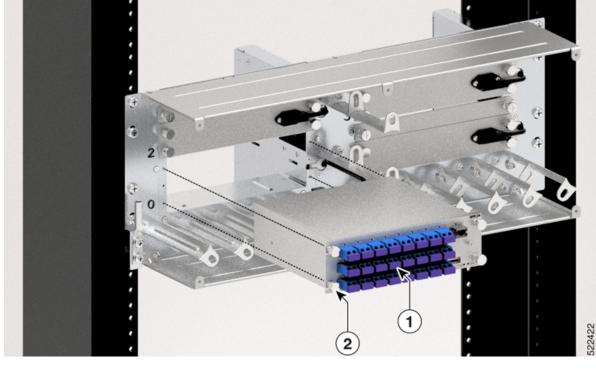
Inserting 24-Port Breakout Module into the Breakout Panel
